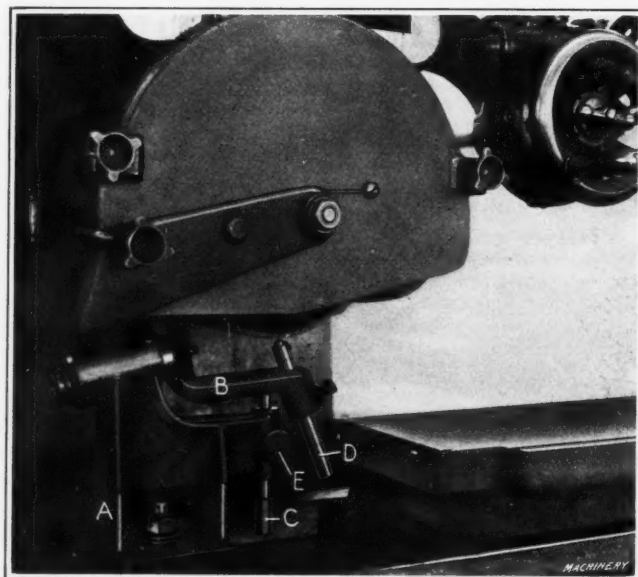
Radius Wheel Truing Device for Use on Norton Surface Grinding Machines
